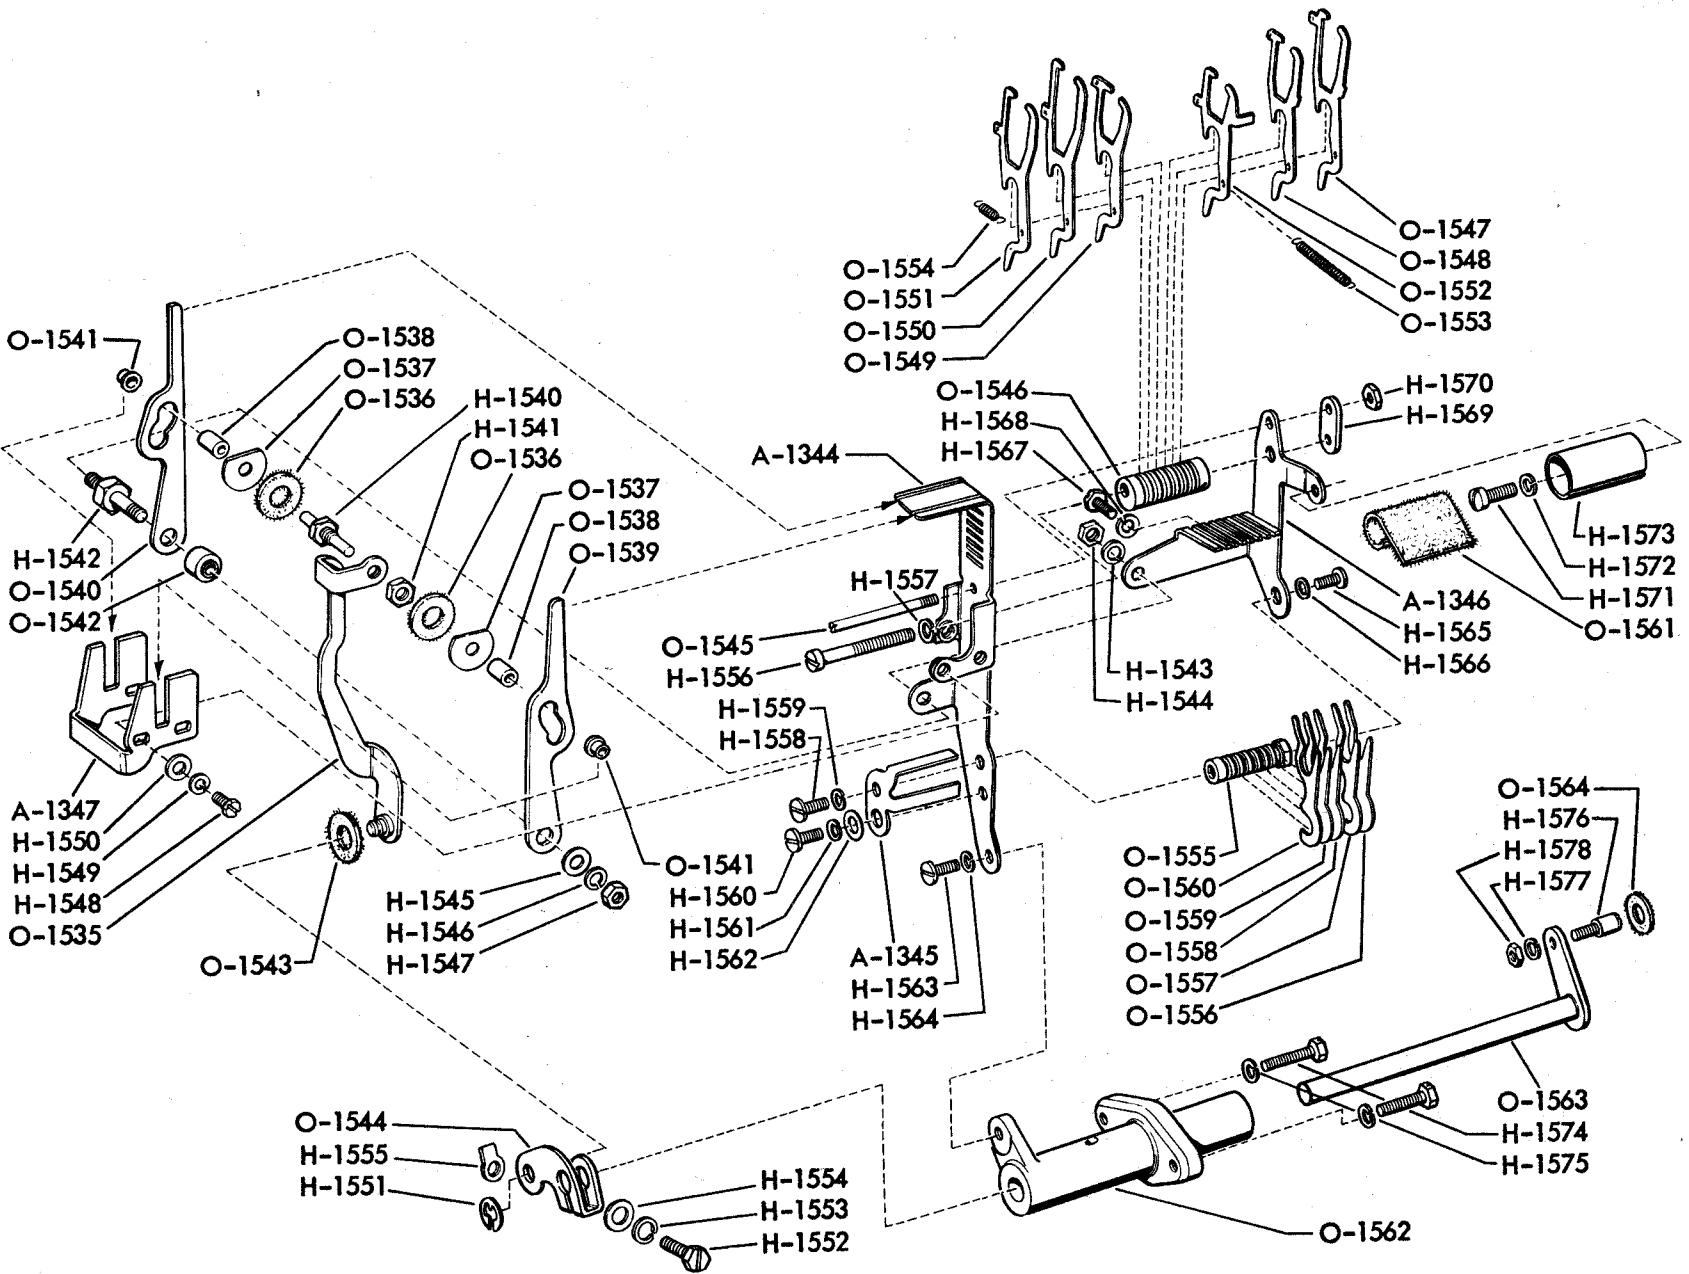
Automatic Typewriter, Code Bar Positioning Mechanism
